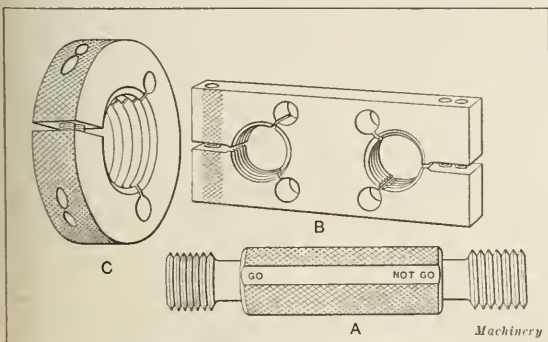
Limit Working and Inspection Plug and Templet Screw Gages
